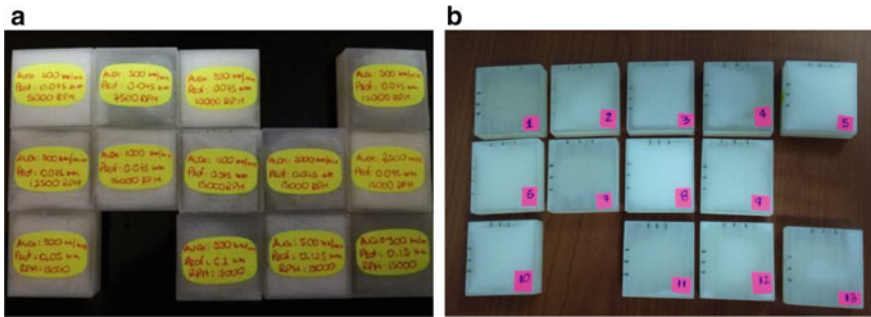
MJP produced workpieces. a Before milling b After milling
